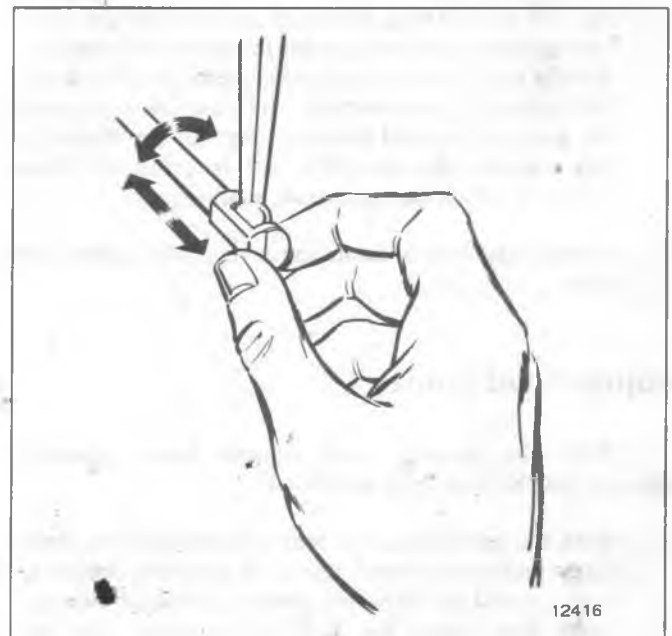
Positioning of the Bellcrank (Former Engines)
